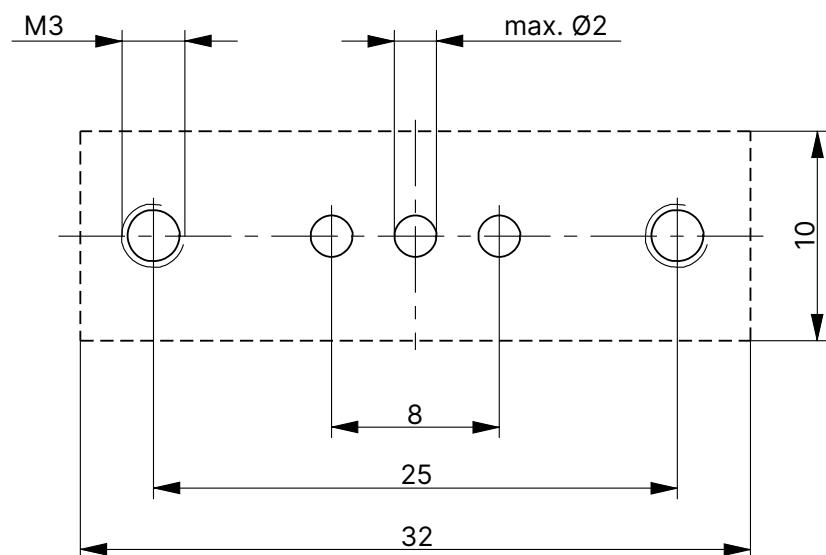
Installation drawing for Bürkert flange FS35 – Hole pattern
